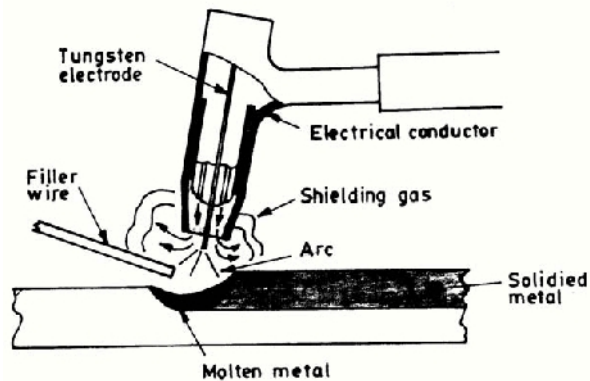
Schematic of a Gas Tungsten Arc Welding Technique.
